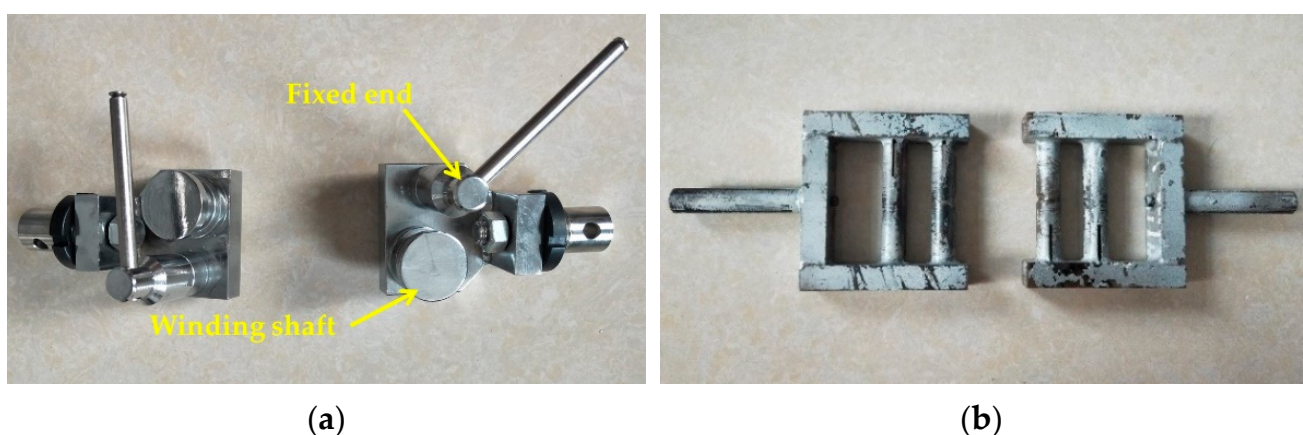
Pictures of the special fixture for the test: (a) special fixture for winding the steel wire; (b) special fixture for winding the reinforced belt.
